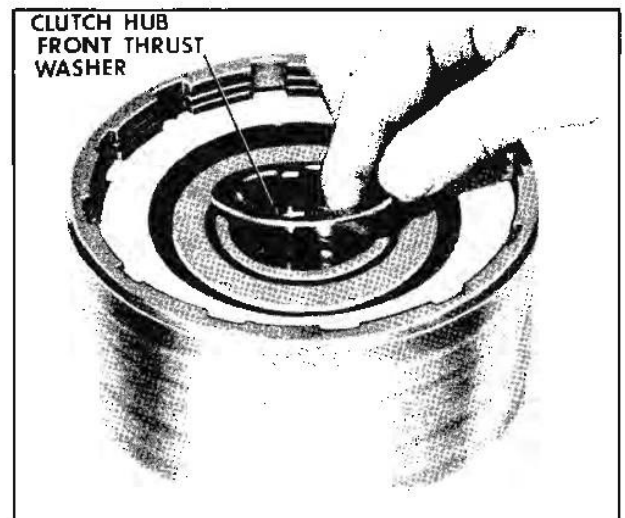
B-74 Removing Clutch Hub Front Thrust Washer
